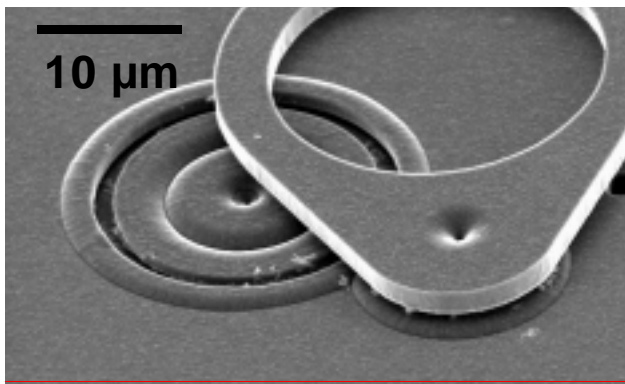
SEM image of a drive pin and a drive gear showing wear debris on the hub of the drive gear.
